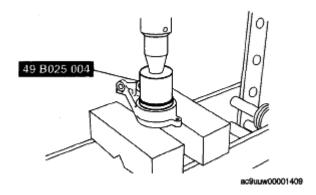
Pressing Bearing With SST Courtesy of MAZDA MOTORS CORP.
